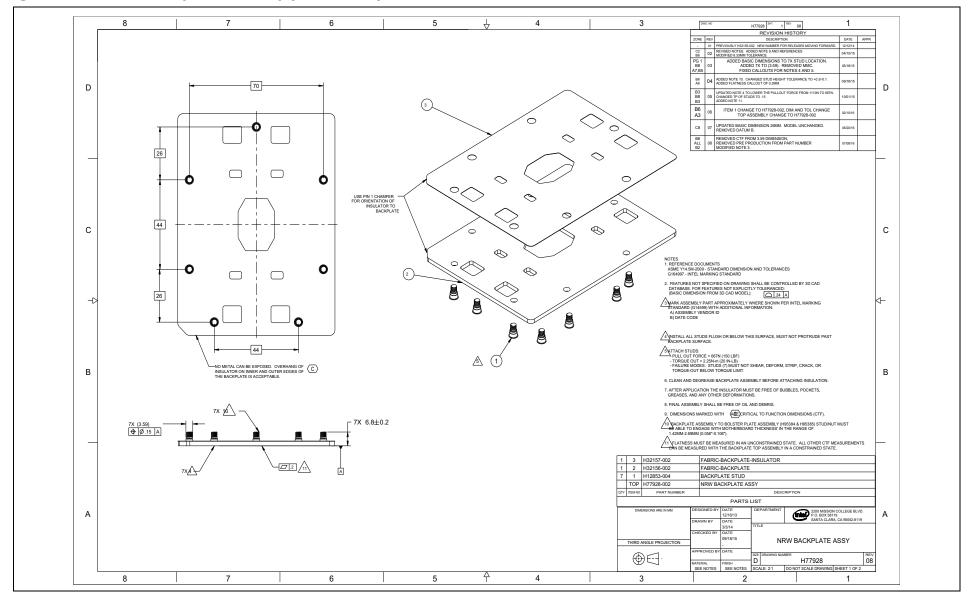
Narrow Backplate Assembly (Sheet 2 of 2)
